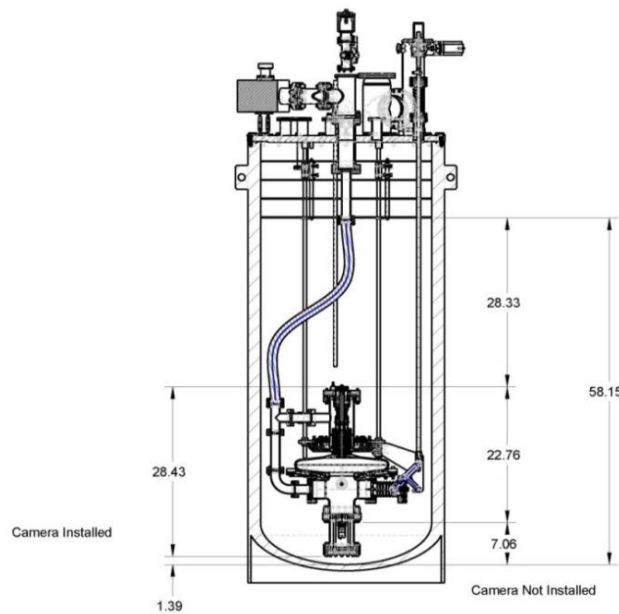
Cavity and dewar assembly with dimensions shown. Note that the camera chamber is shown in the schematic, attached to the bottom of the cavity.
